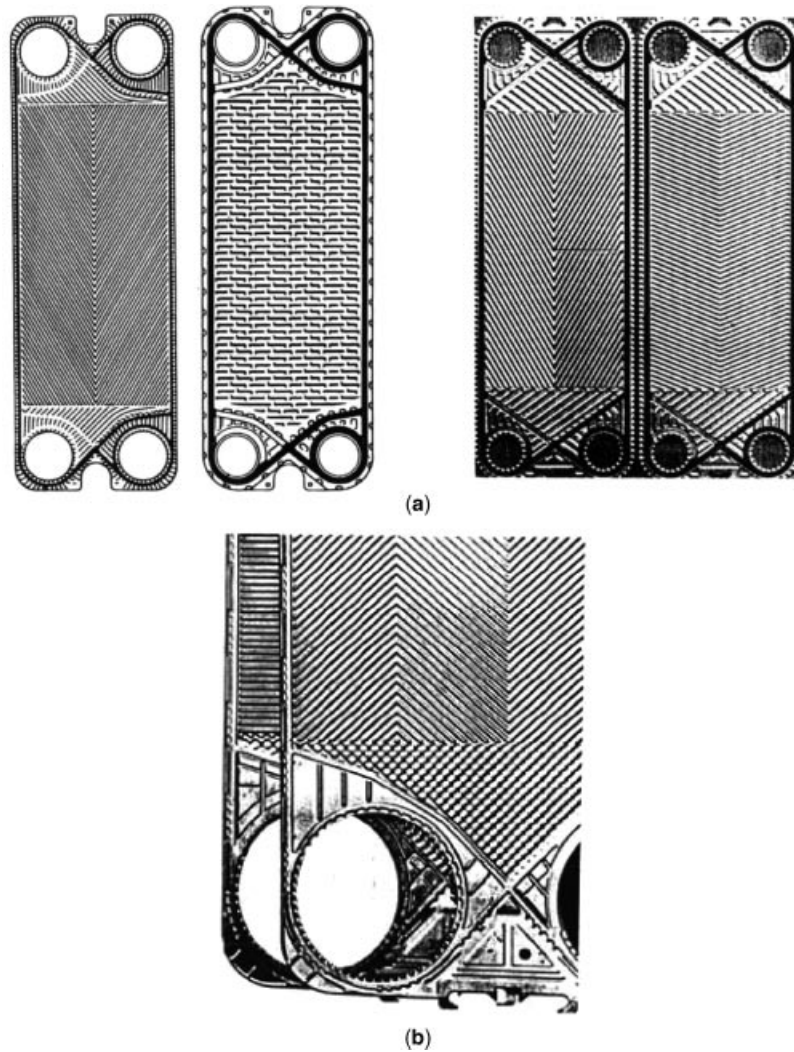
(a) Plate pattern; (b) Plate pattern.
